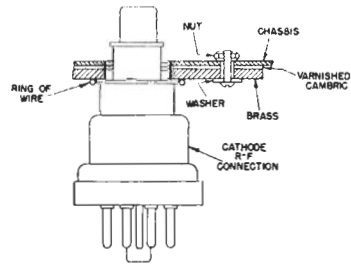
Detail Showing Proper Mounting for GL-2C43 Tubes
